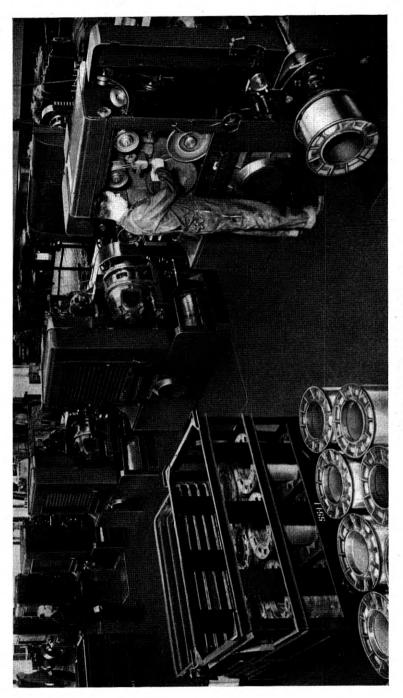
Up-ending device for 1000-pound supply reel at back of No. 2 machine
